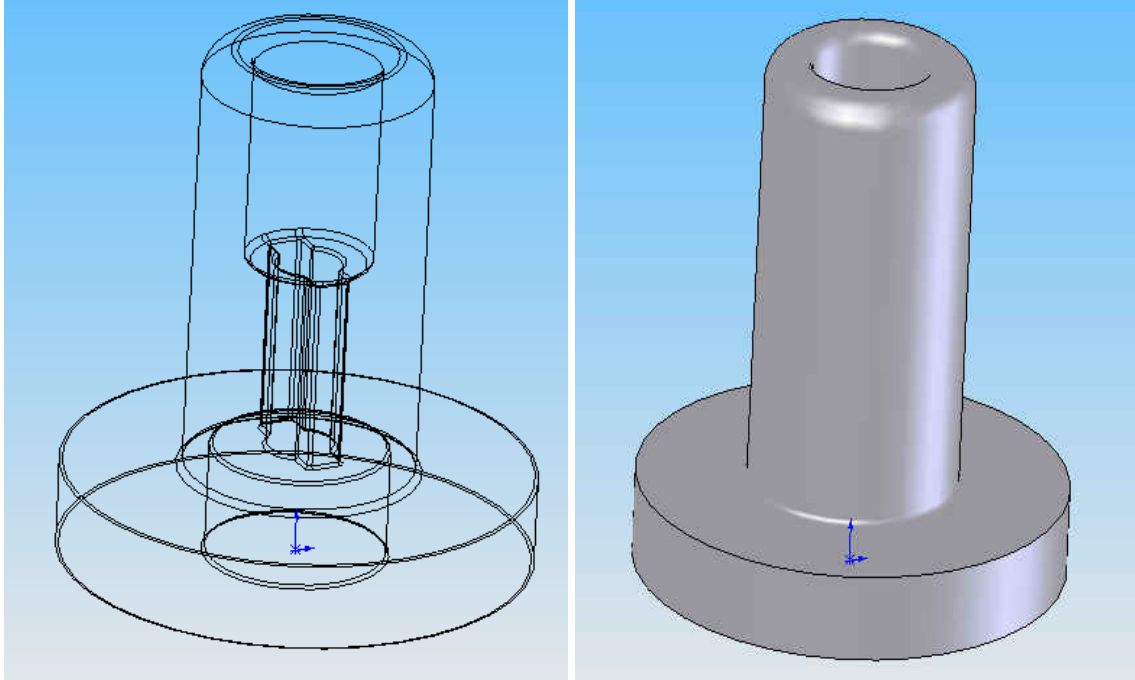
Bottom insert of cylinder. Transparent to show inner surfaces necessary to spin on the shaft. Solid for a final design look
